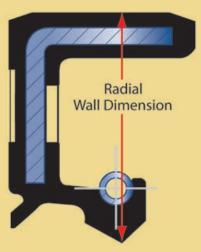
Radial Distance Between Seal O.D. & Seal Contact Point
